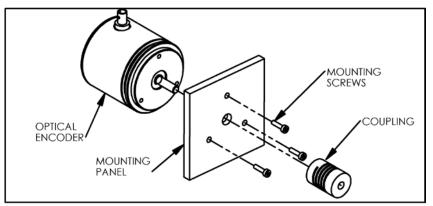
Shafted Encoder Face Mount via Counter-Bored Panel
